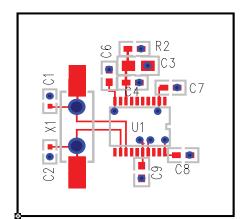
B. 843002 PC BOARD LAYOUT EXAMPLE
